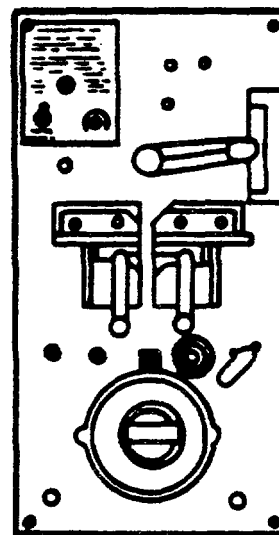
DBW-15 WELDER, GRINDER - FRONT VIEW.
